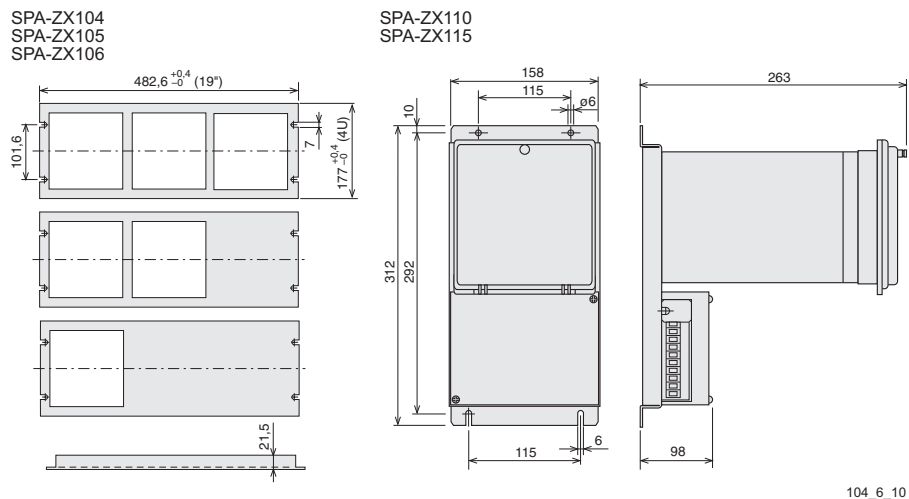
Mounting cabinets and frames as well as projecting mounting (dimensions in mm)
